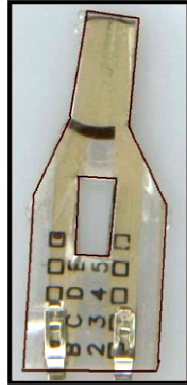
Improved trimming process replaces two tails with box slit for mounting on grasper.
